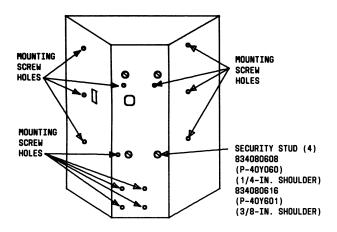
Location of Mounting Screw Holes and Security Studs In 2D-Type Set
